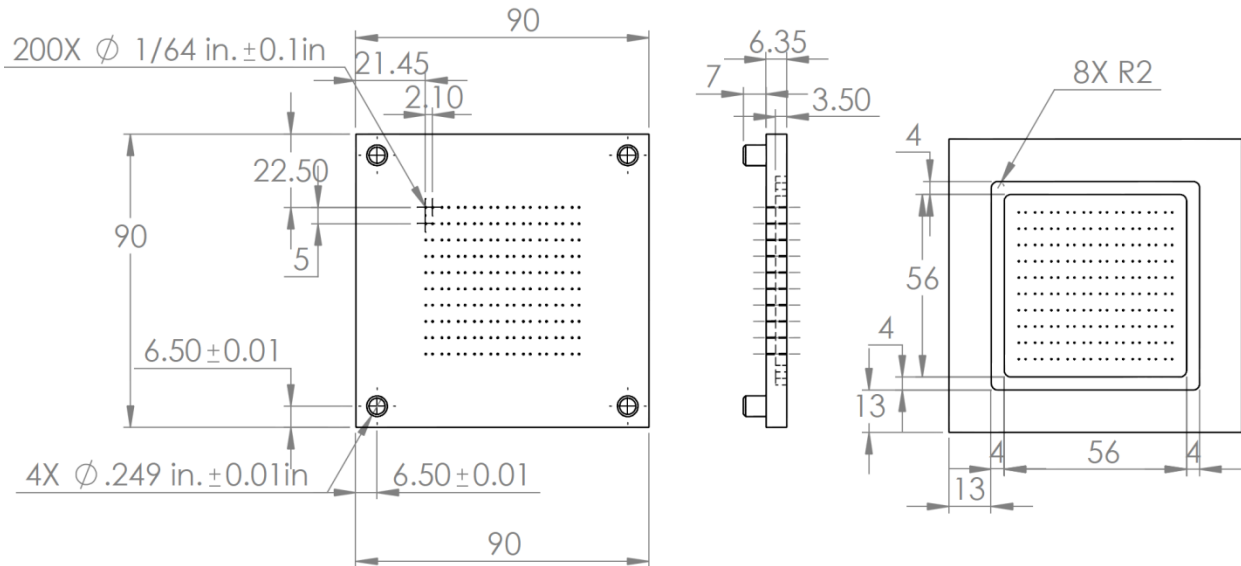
The ridge for the bead die plate for our prototype design. All dimensions are in mm with a tolerance of 0.1 mm unless other specified.
